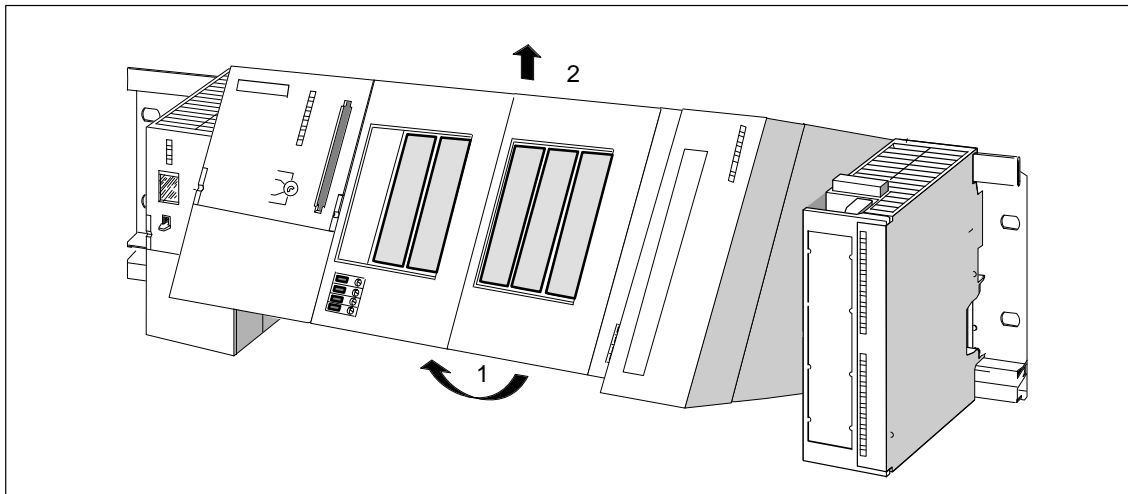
Swinging a Module Assembly Comprising CPU and Expansions upward and Lifting it off
